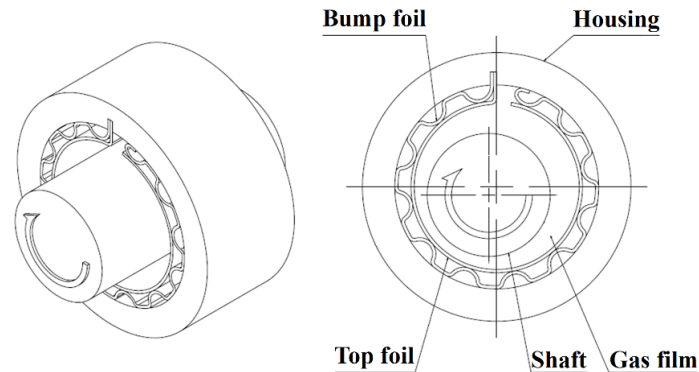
Three dimensional projective and two dimensional schematic drawings of a bump-type GFBs; major components of GFBs include shaft, top foil, bump foil and support housing in which the clockwise arrow shows the shaft rotational direction.
